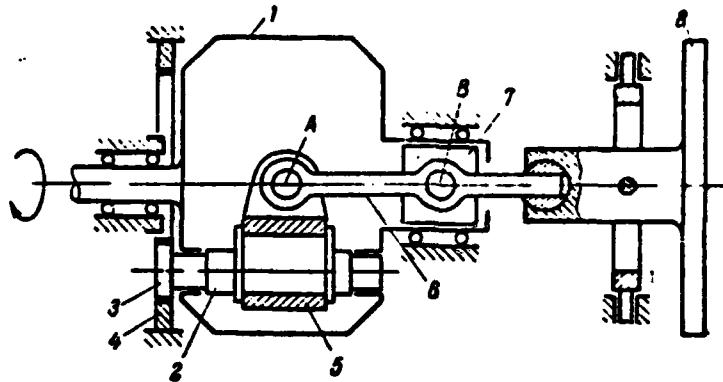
Scanning device/equipment with the use of a three-dimensional-crank mechanism.
